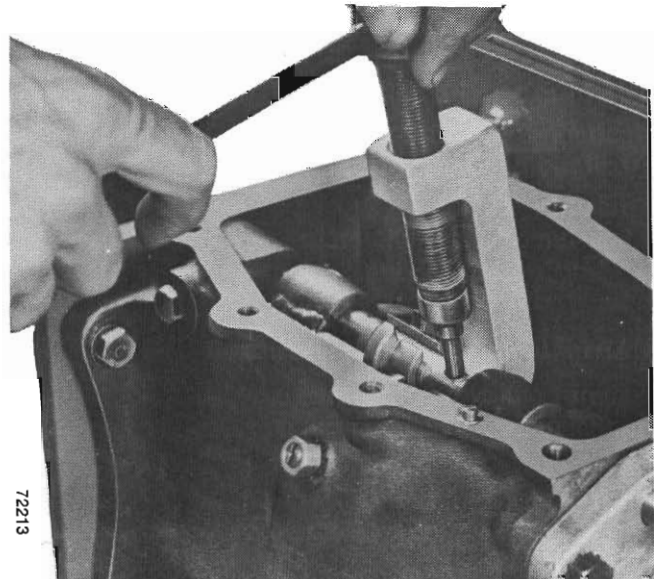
Removing gearshift rail operating pin using Tool No. E21C20.
